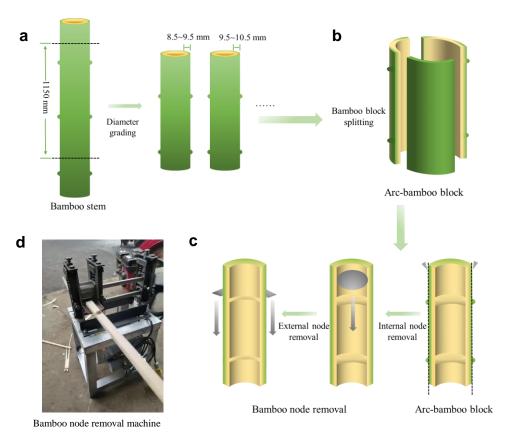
Bamboo preprocessing. a) bamboo tube grading, b) arc-bamboo block splitting, c) bamboo node removal, d) bamboo node removal machine
